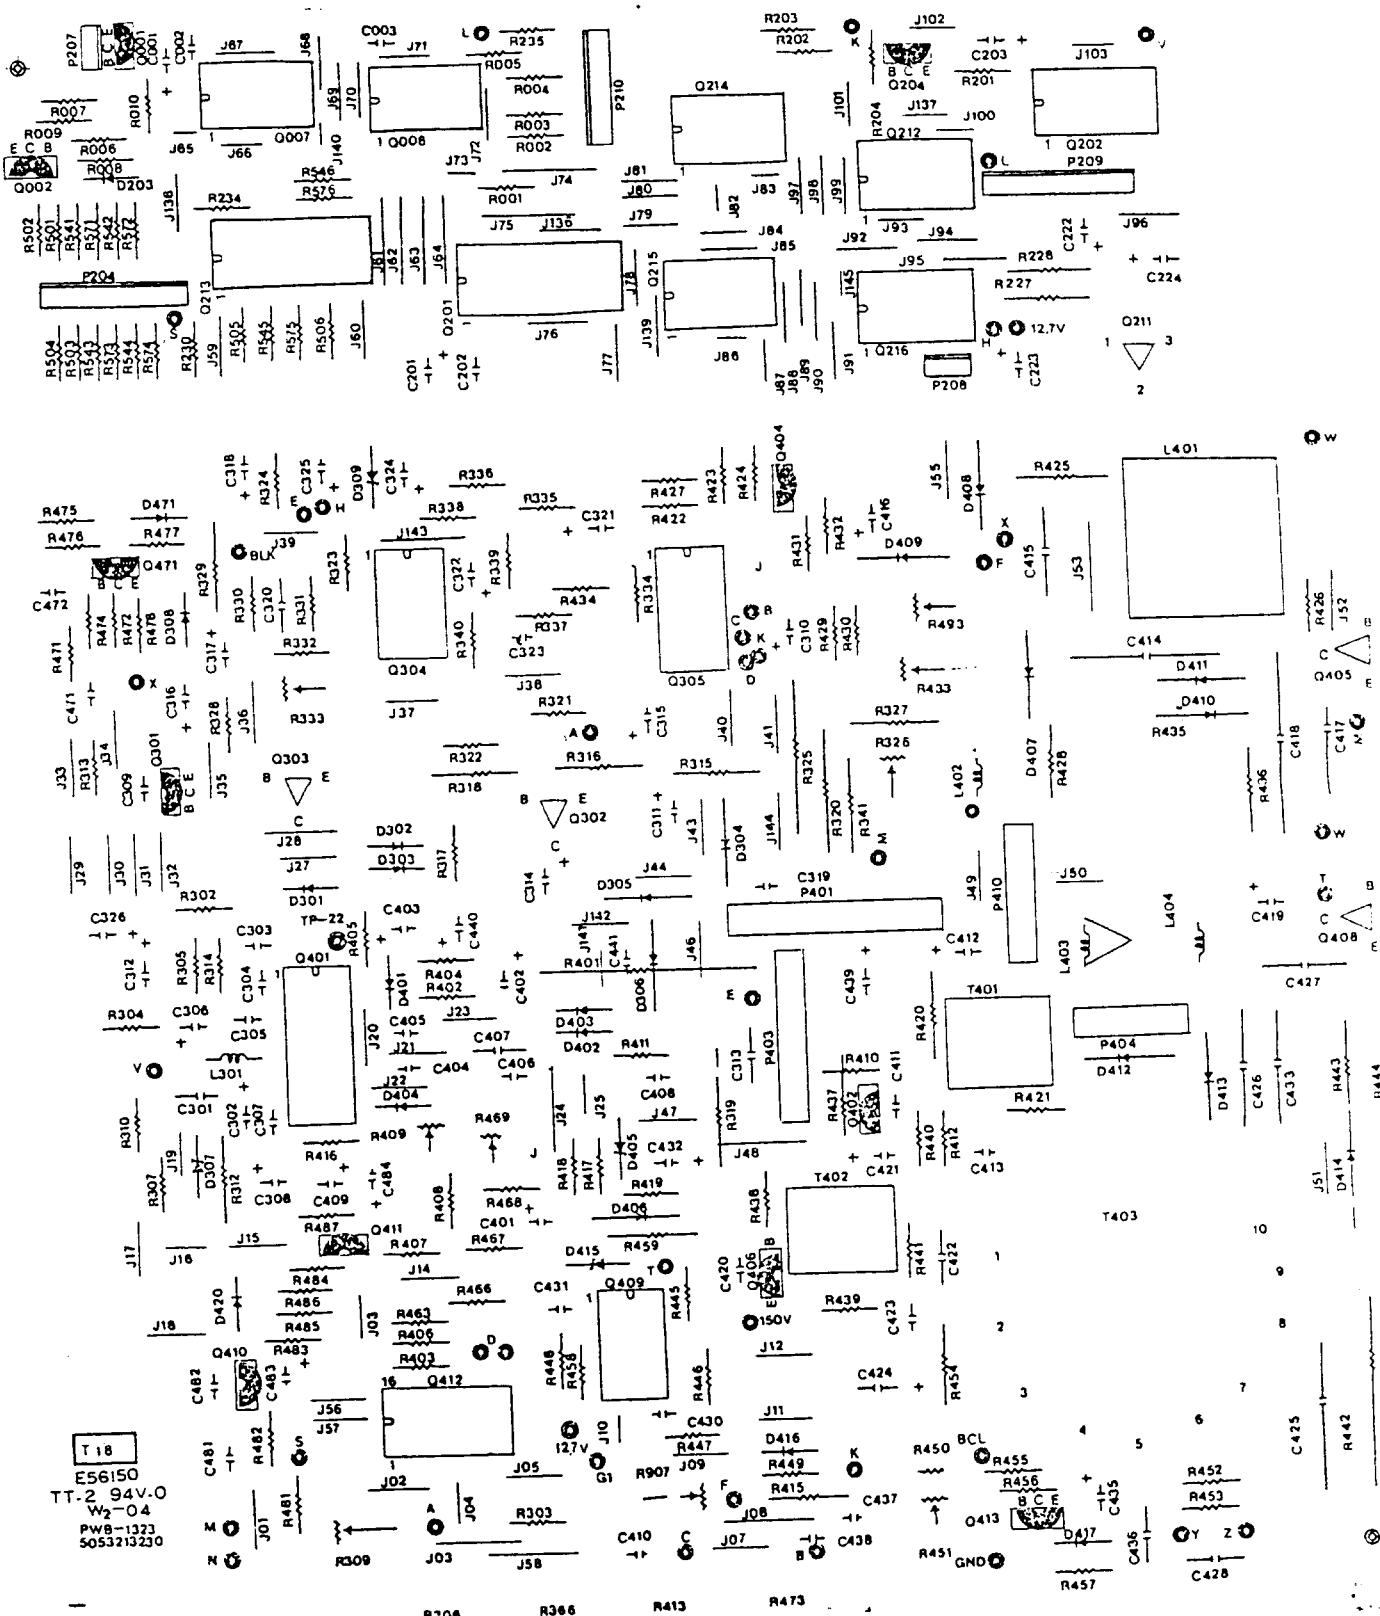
PCB-MAIN COMPONENTS LAYOUT
